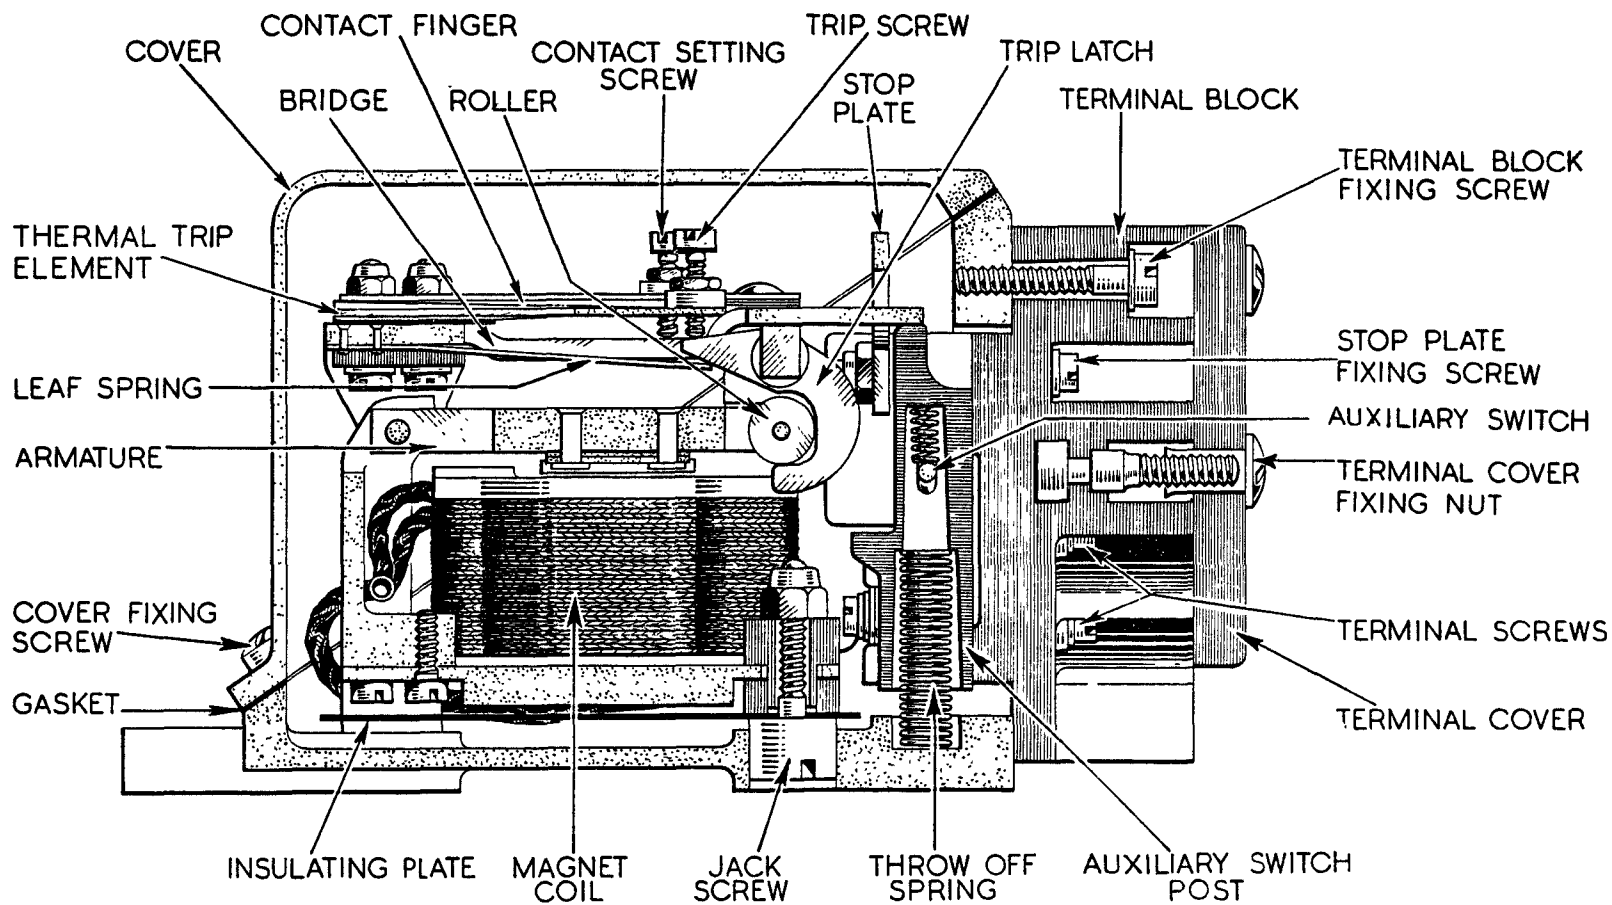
Sectional view of thermal circuit-breaker, type B
